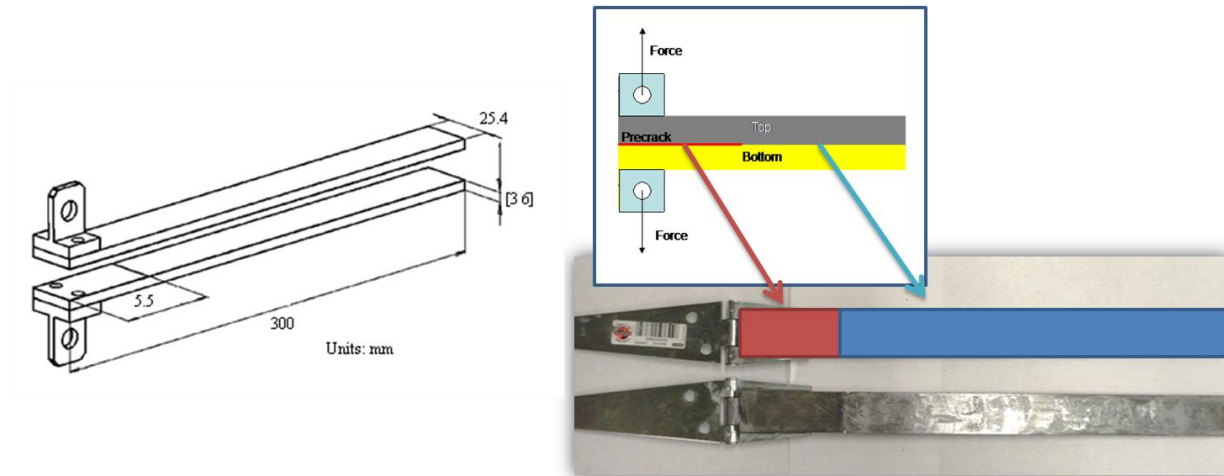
Double cantiliver beam (DCB) specimen: Two beams of steel 1018 bounded with Loctite 415. Precrack length: 55 mm.
